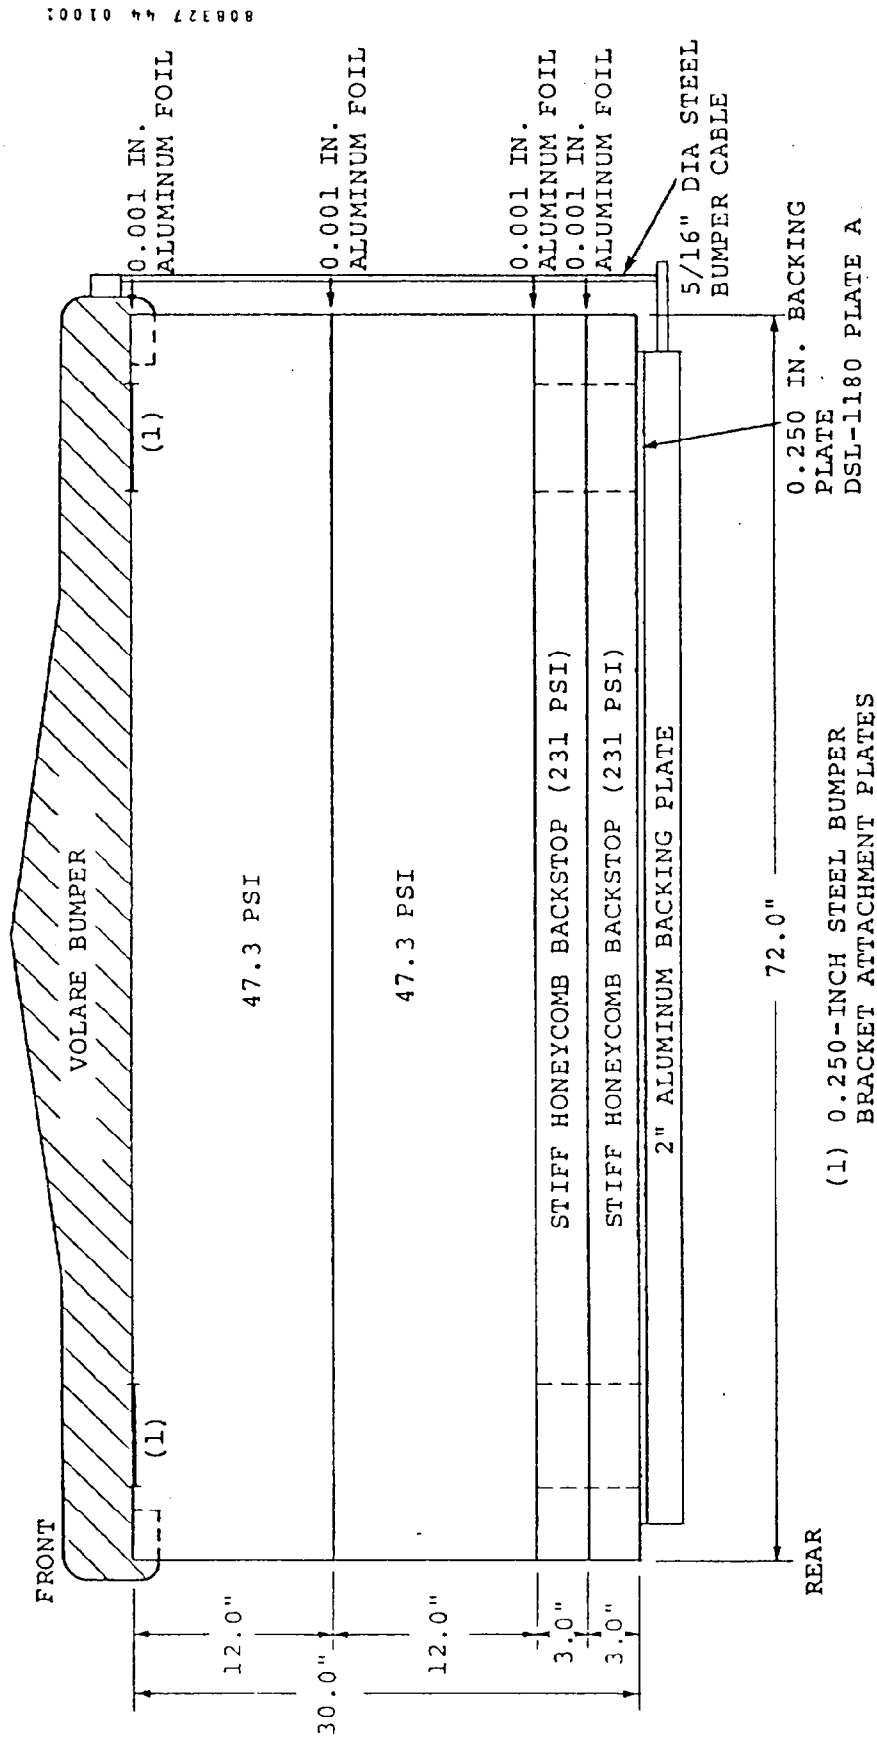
Top View Schematic of -10A Assembly Honeycomb Face Showing Crush Strengths (PSI) of Honeycomb Blocks (Test 8327-4.1).
